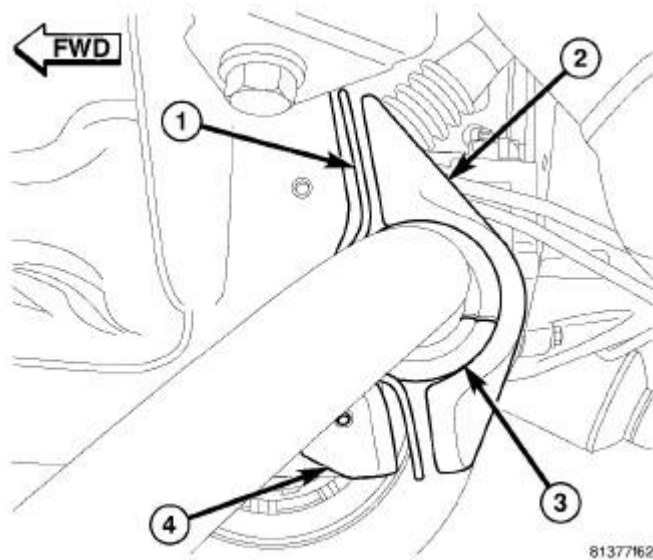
FRONT STABILIZER BAR BUSHING RETAINER
